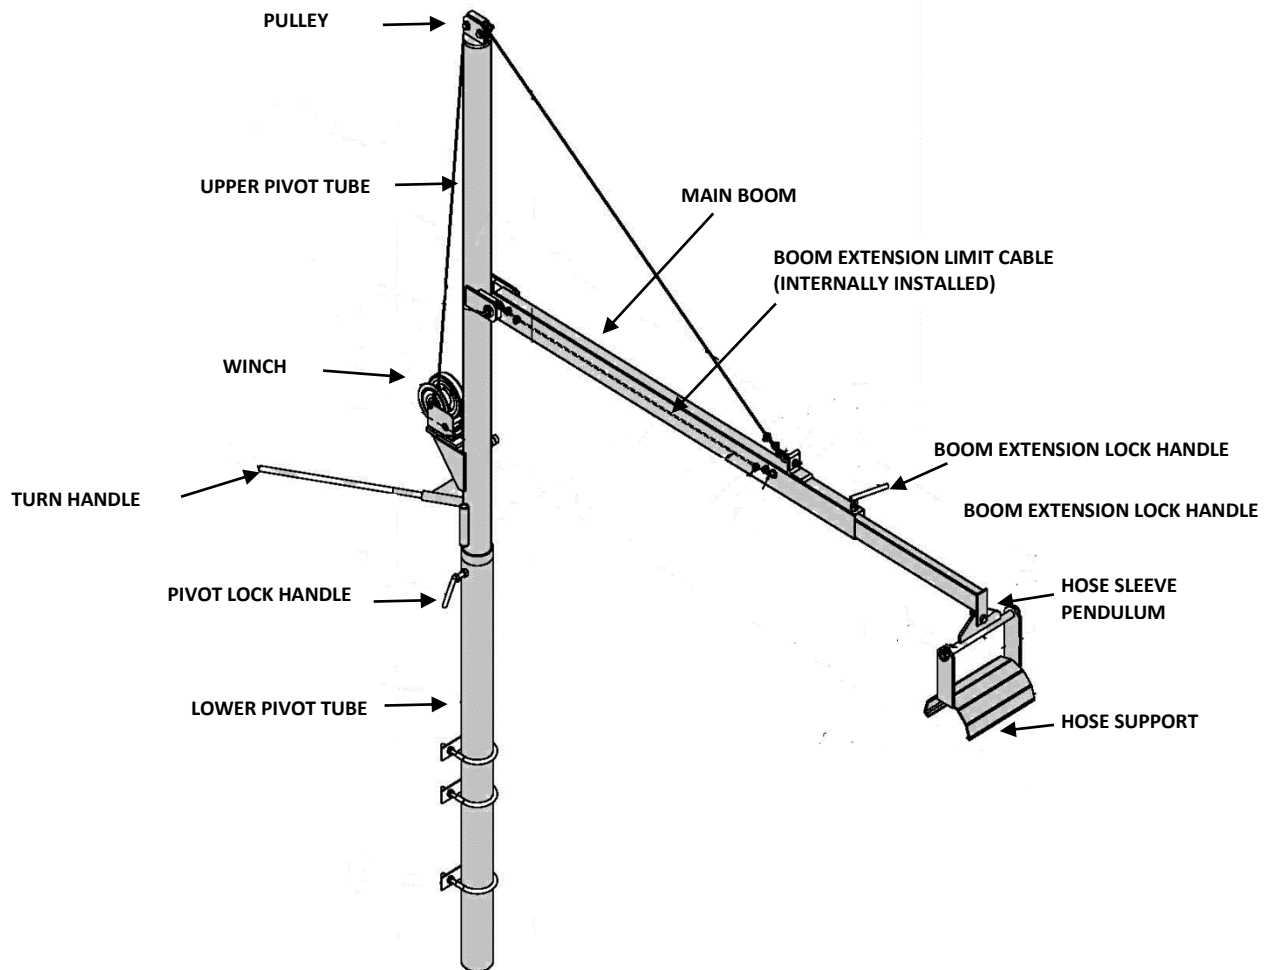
HOSE HANDLER ASSEMBLY COMPONENTS
